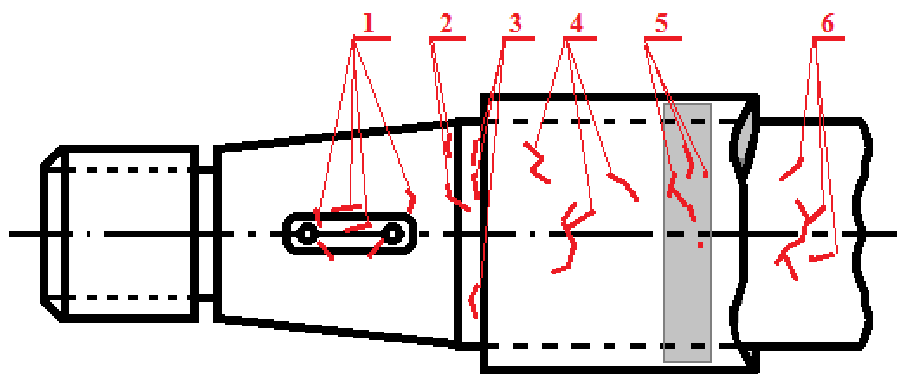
Main locations of the crack possible origin in the shaft: 1 – in the slot, close to it with the progress of cracks deep into the shaft body in the fastening holes; 2 – in the places of transition of the cone into a cylindrical form shaft; 3 – at the front and edges of the shaft sides; 4 – cracks in the walls of the shaft; 5 – in the welding and heat affected zones; 6 – directly in the body of the shaft
